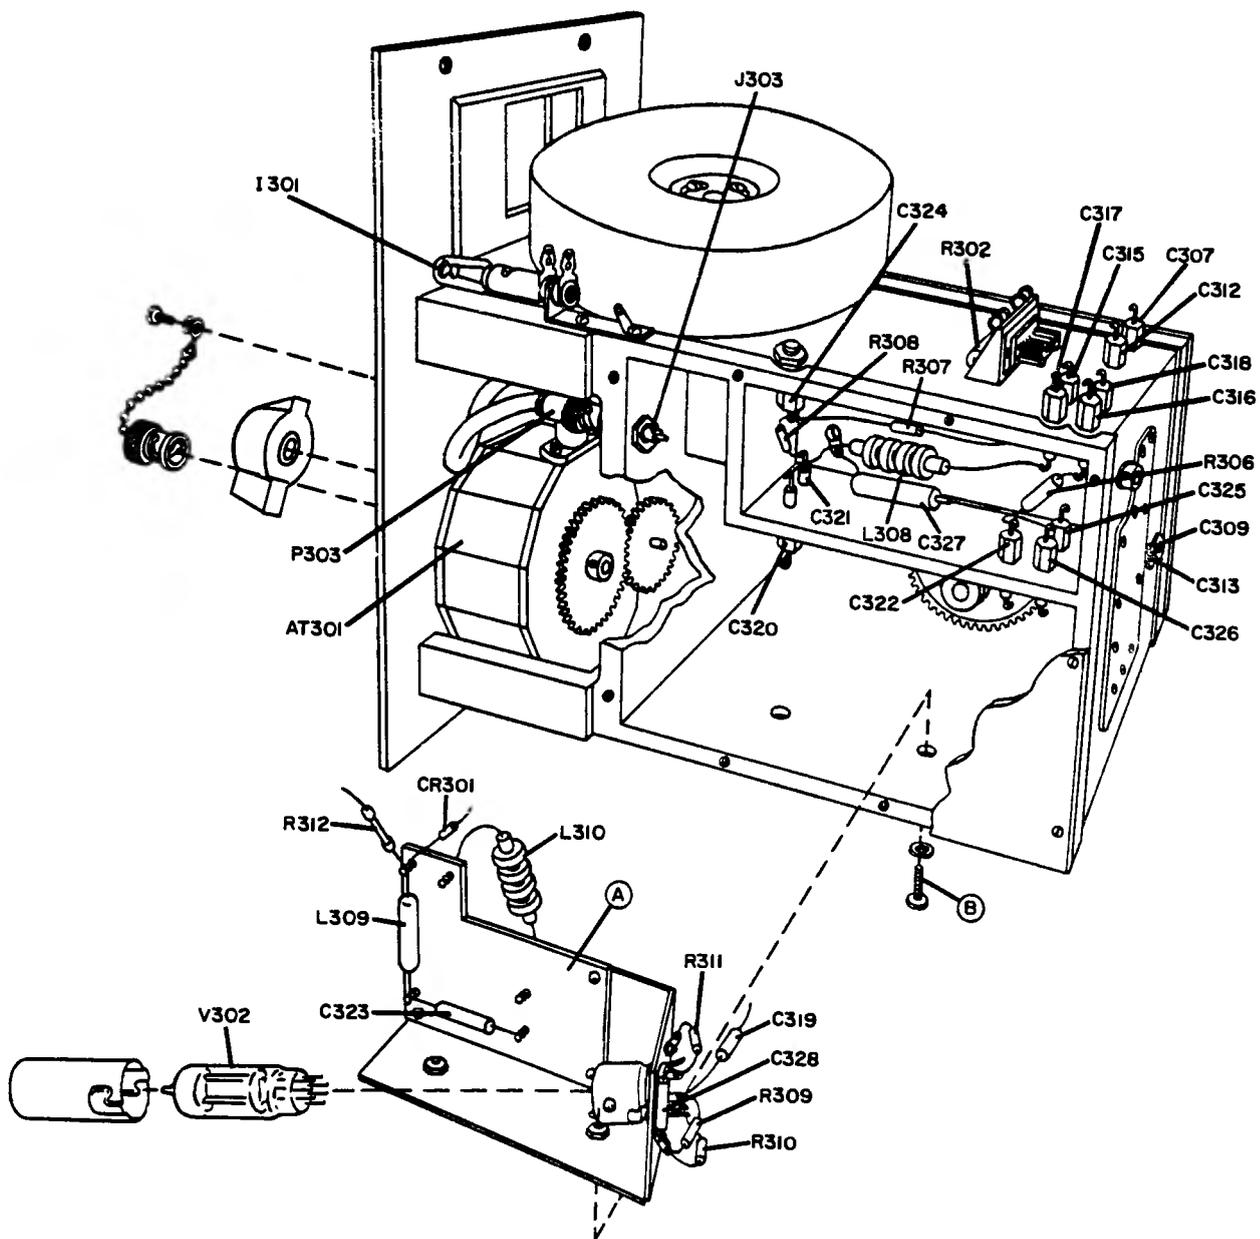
Signal Generator SG-32/TRM-1, Exploded View, Right Side
